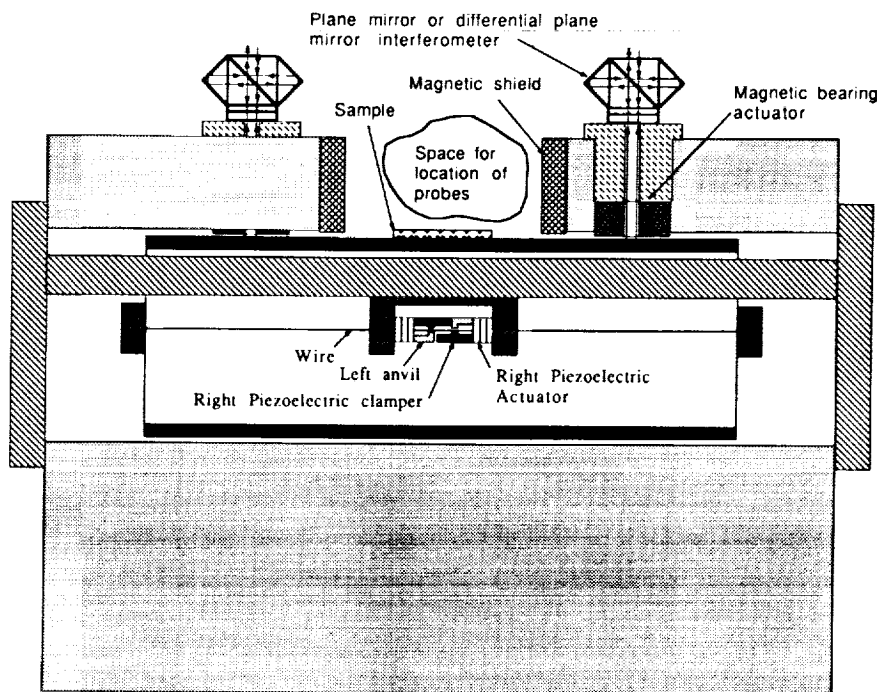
Cutaway side view of Atomic Resolution Measuring Machine (ARMM)
